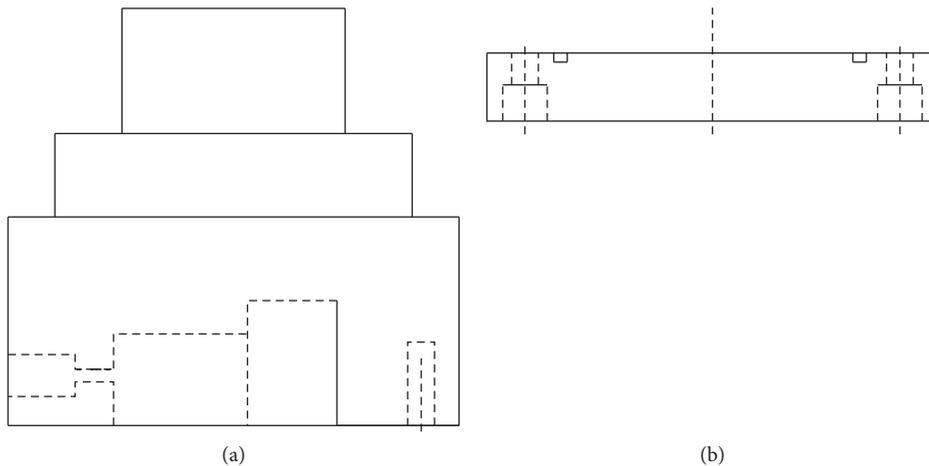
Test head side view: (a) main part and (b) closed part.
